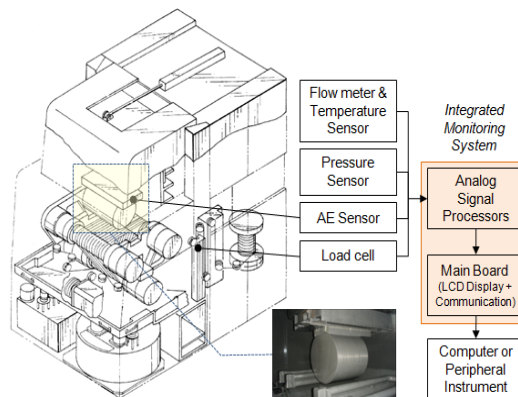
Basic Structure design and sensor signal processing block diagram of wire saw machine
